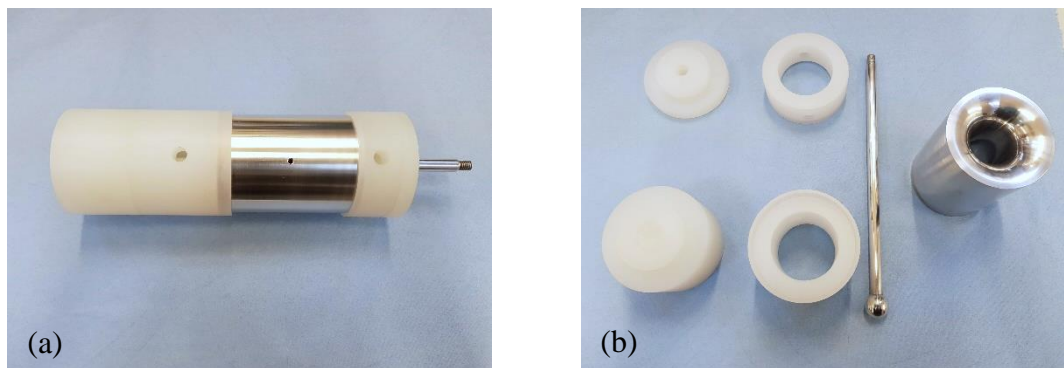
Fabricated reduced-scale coaxial prototype (a) fully assembled and (b) disassembled into individual components.
